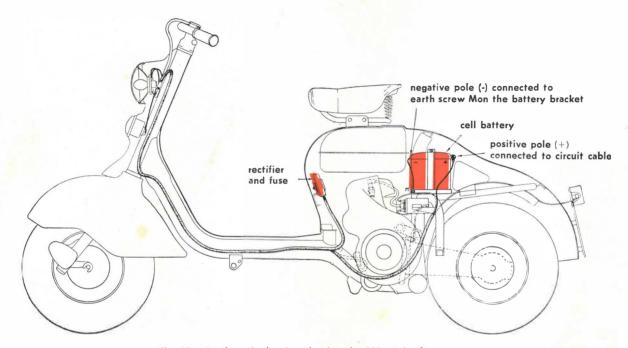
A schematic drawing showing the 150 cc. Lambretta
